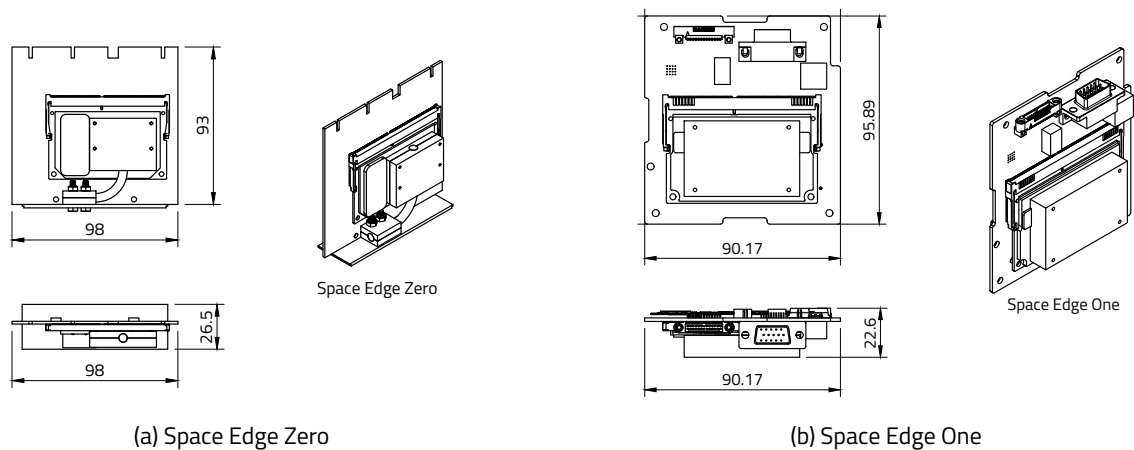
Space Edge Computer drawings. All dimensions are in mm.
